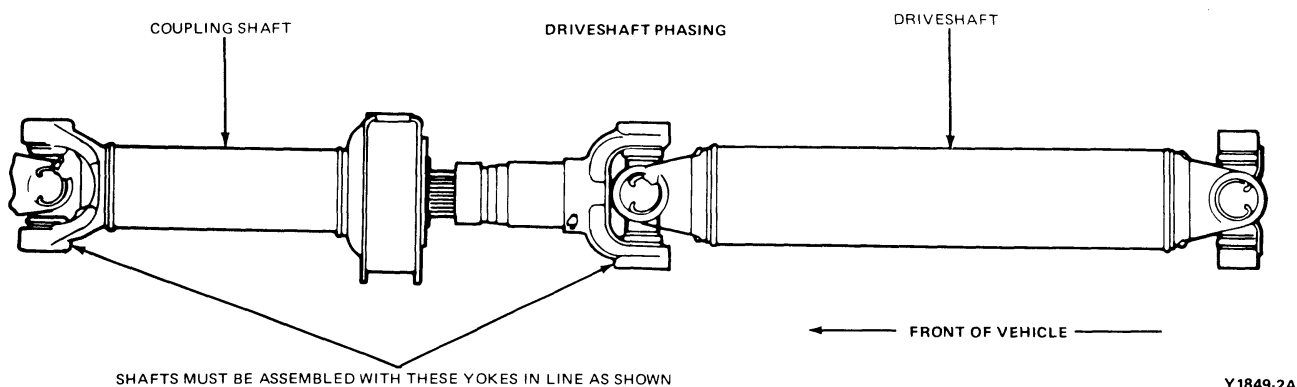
Driveshaft Phasing—Two-Piece Driveshaft
